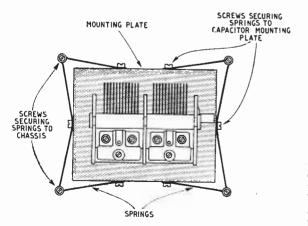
Top view showing how a tuning capacitor is mounted on two of the springs in Fig. 7.
